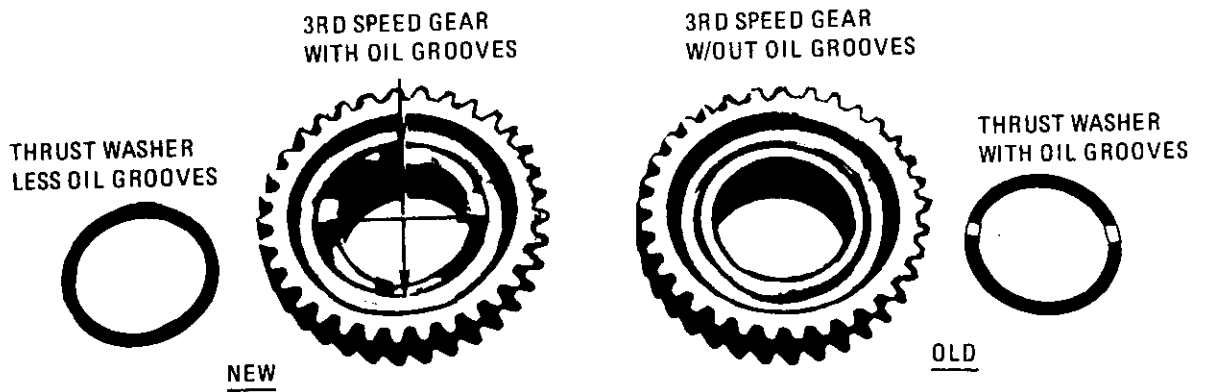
3RD SPEED GEARS WITH AND WITHOUT OIL GROOVES
